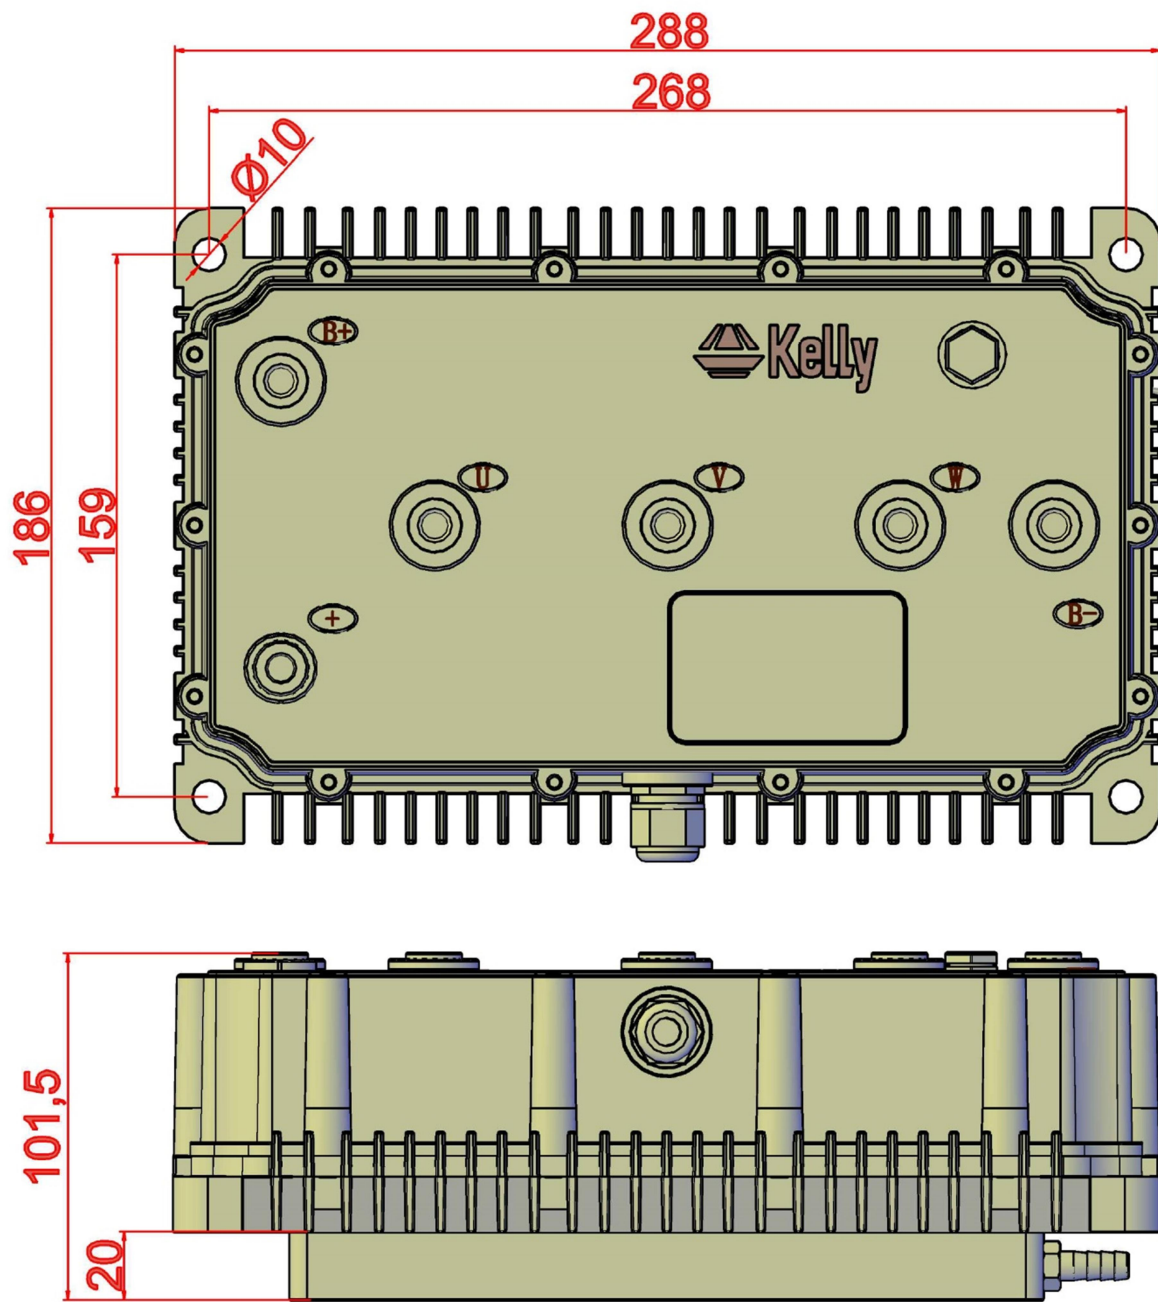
With Aluminum Liquid Cooling Heatsink at the bottom
